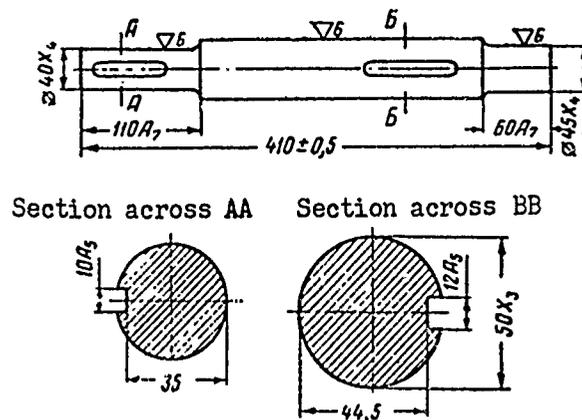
Shaft (stock -- roller ϕ 55mm, KZO steel).
